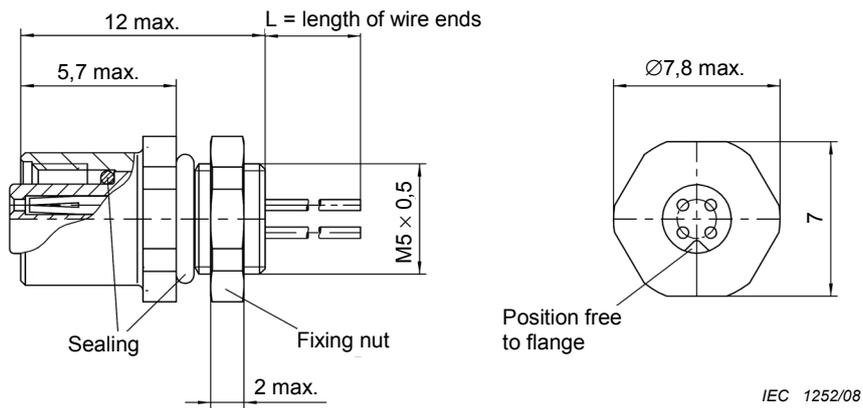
Fixed connector, female contacts, mounting with thread M5 x 0,5, with wire ends, single mounting, thread M5 x 0,5, mounting orientation
